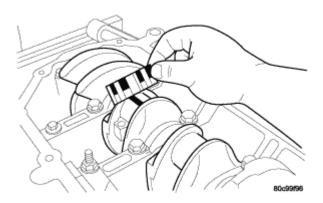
BEARING SELECTION Courtesy of CHRYSLER LLC
